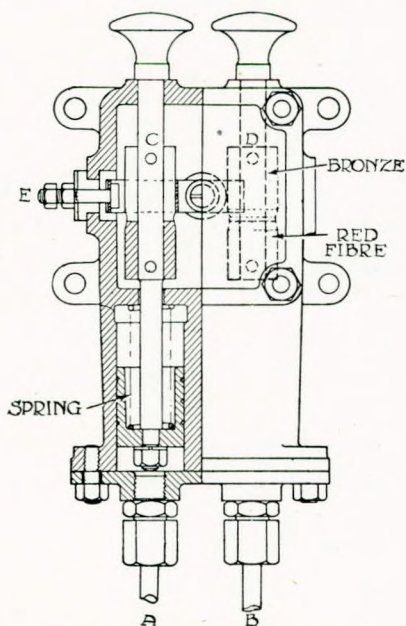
This National device is used for indicating failure of the lubricating oil pressure.
